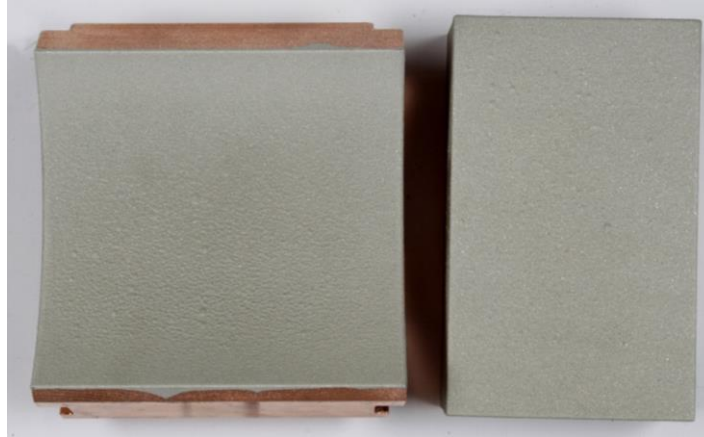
Bearing Pad and Test Specimen after Arc Spraying
